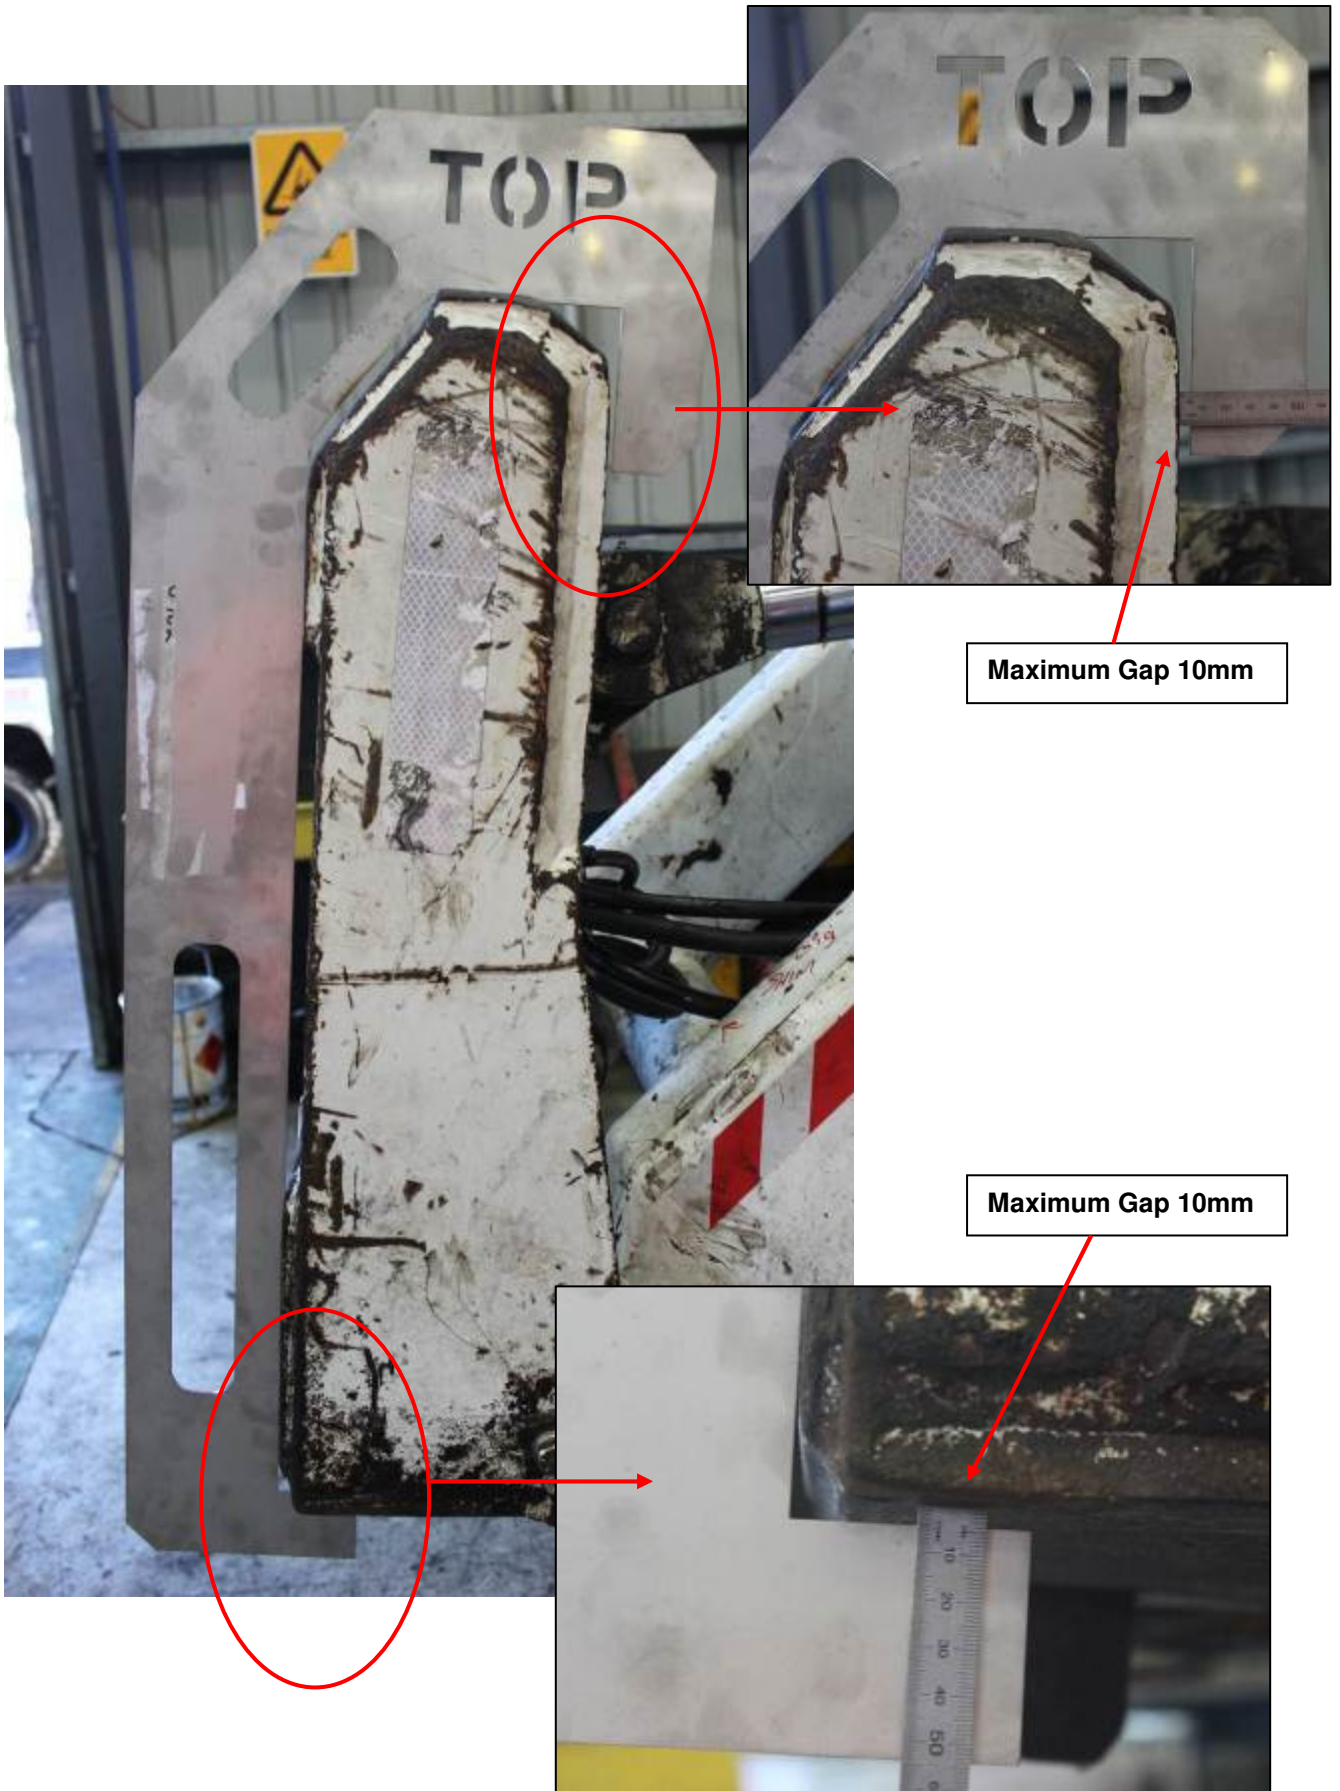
QICS Plate Inspection Gauge Part No. 5-12170702
